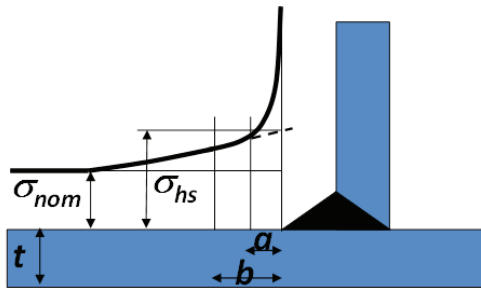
Definition of the hot-spot stress at a weld toe.
